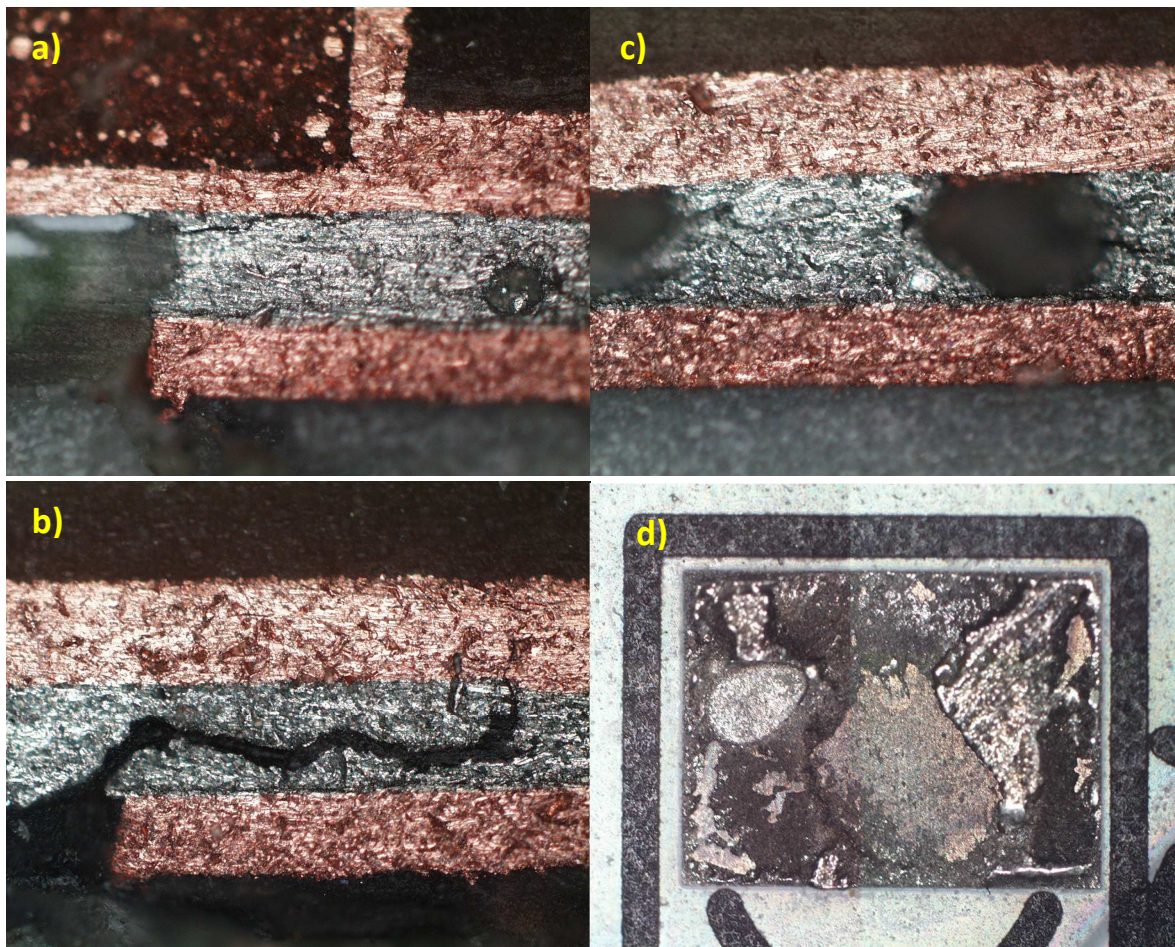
Master FR4 board defectoscopy a); b) Crack in the solder layer; c) Voids in the solder layer; b) Delamination and crack surfaces
